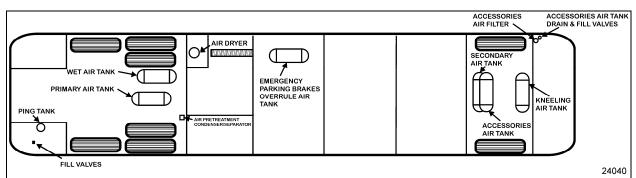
I-BEAM FRONT SUSPENSION AIR TANKS LOCATION
